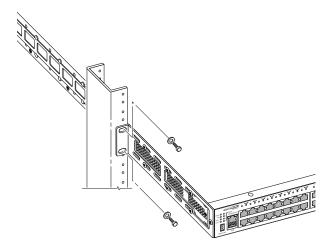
Removing a Front-Mounted Switch from a Two-Post Rack
